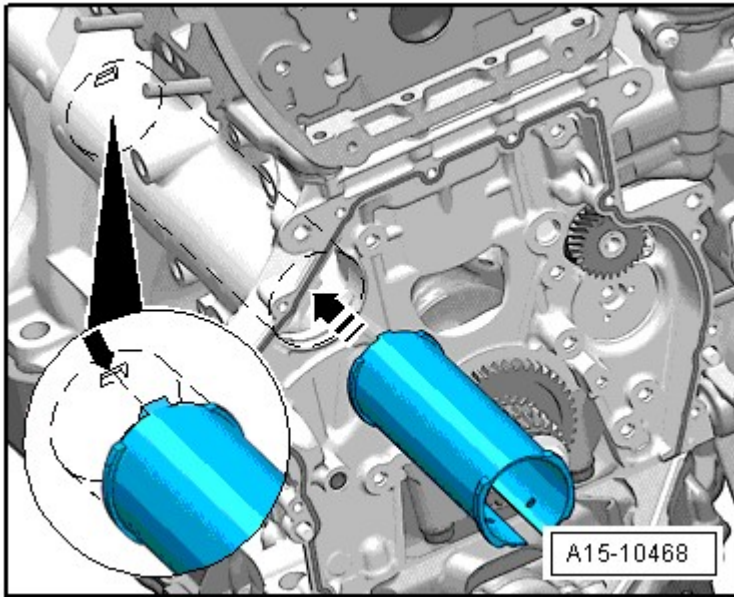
Identifying Pipe For Balance Shaft - Installation Position
